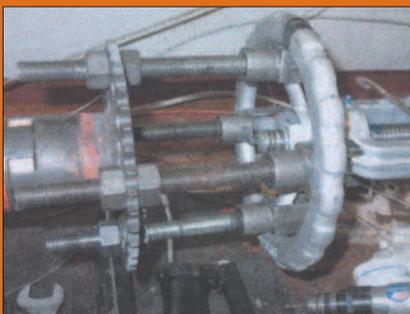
A connection from the gearmotor to the handwheel is made to minimize side-loading.
